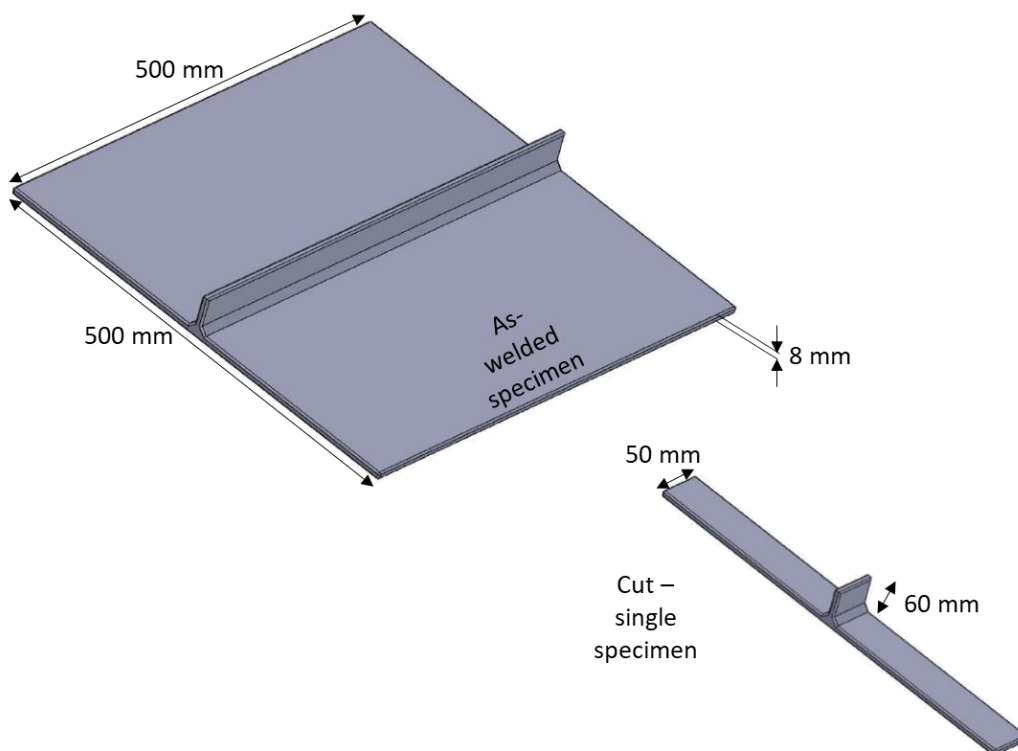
Schematic of MAG single side welded joints. Top – as-welded; bottom – after specimen cutting.
